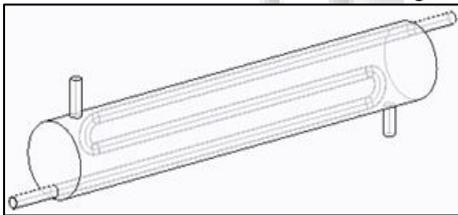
CAD Model of Shell and Serpentine Heat Exchanger
